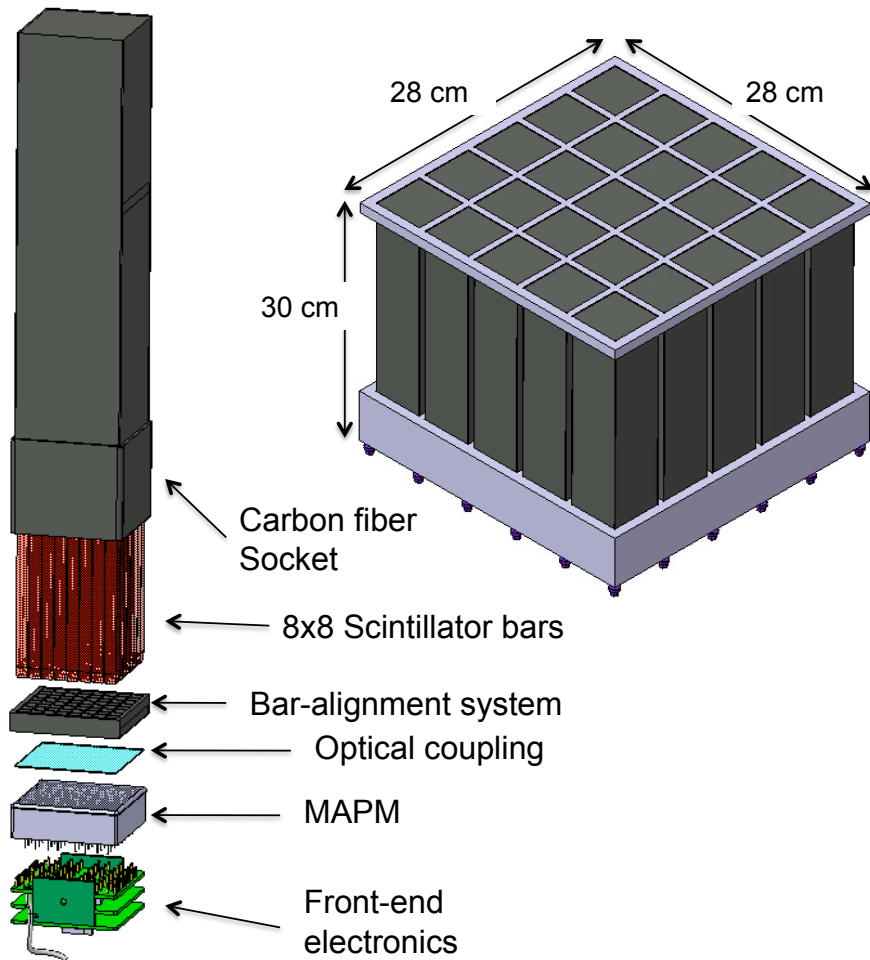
Scheme of POLAR detector. *Left*: Exploded view of one module from POLAR target. *Right*: Complete POLAR target, i.e., the assembly of 25 modules, with its approximate dimensions.
